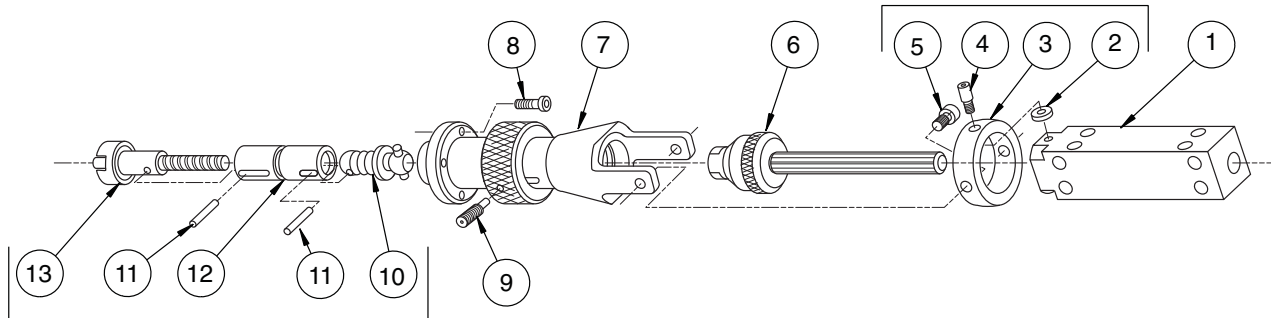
C – ANR-STYLE HONE HEAD UNIT
